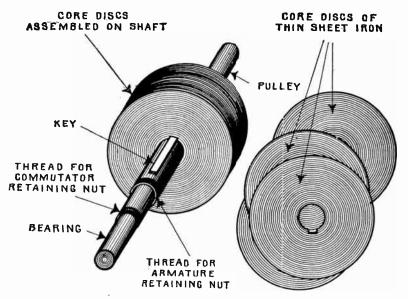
Laminated smooth core armature partly assembled. It consists of numerous discs of thin sheet iron threaded on the shaft and pressed together by end plates. The object of this construction is to prevent eddy currents.
